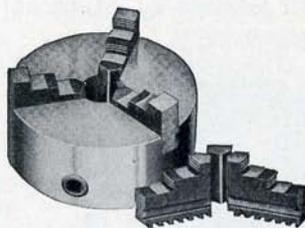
6-inch, 3-Jaw Universal Lathe Chuck, will hold 6 1/8-in. Cat. No. 2406. Price.....\$35.00
